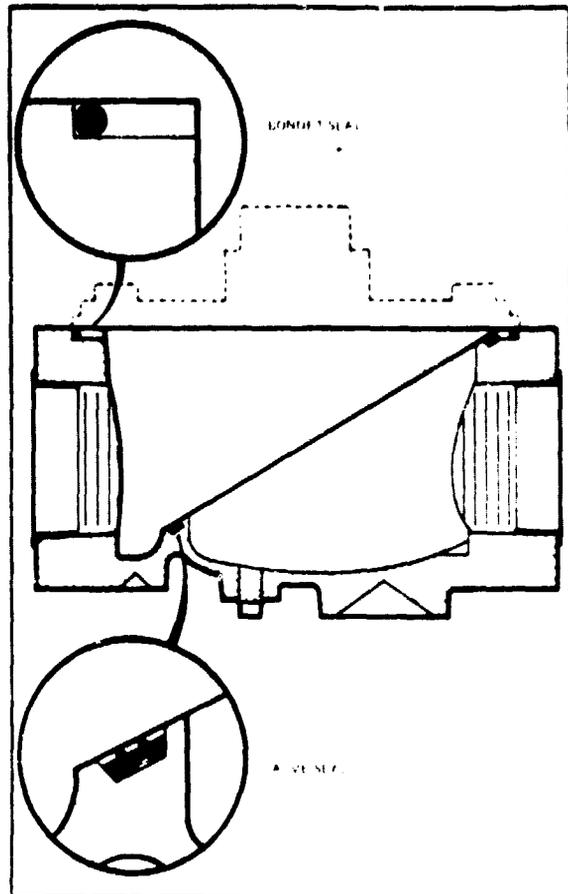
PROPER POSITIONS OF VALVE AND BONNET SEALS IN 3/4 THROUGH 3 in. VALVES.
